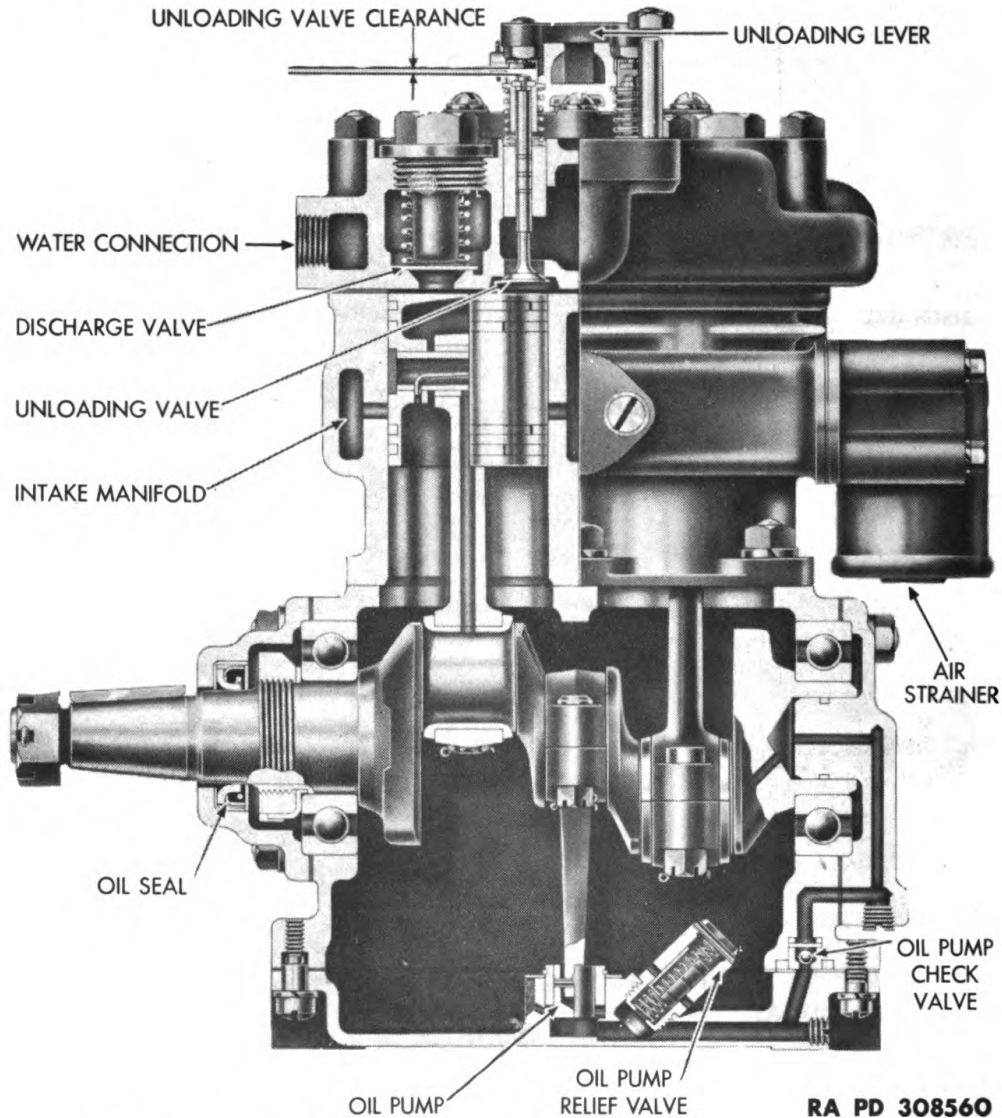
Sectional View of a Two-cylinder Self-lubricated Compressor
